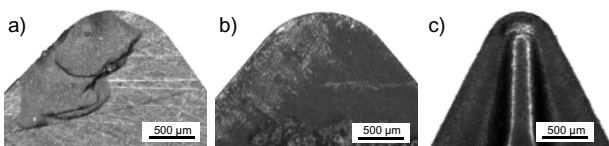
Tool wear after Complementary Machining of AISI 4140 with uncoated (a) and coated tools type I (b) and type II (c) without lubrication
